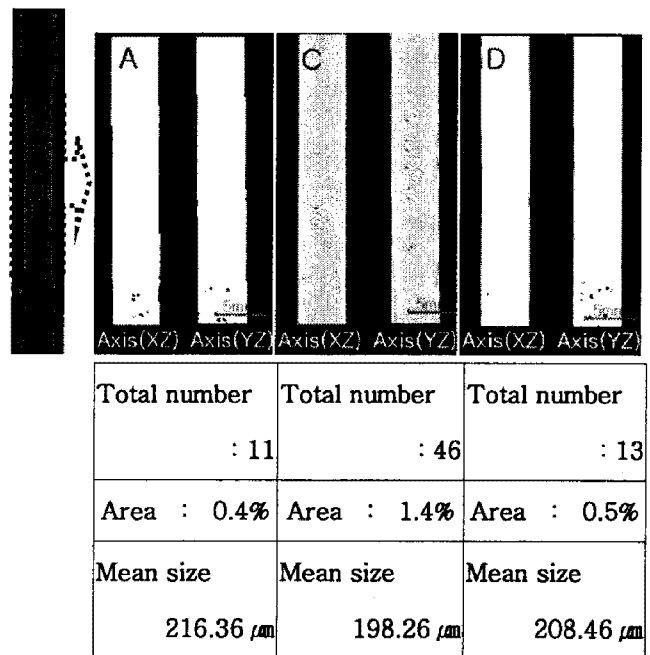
CT results showing the position and the appearance of forming defects in the tensile test specimens
